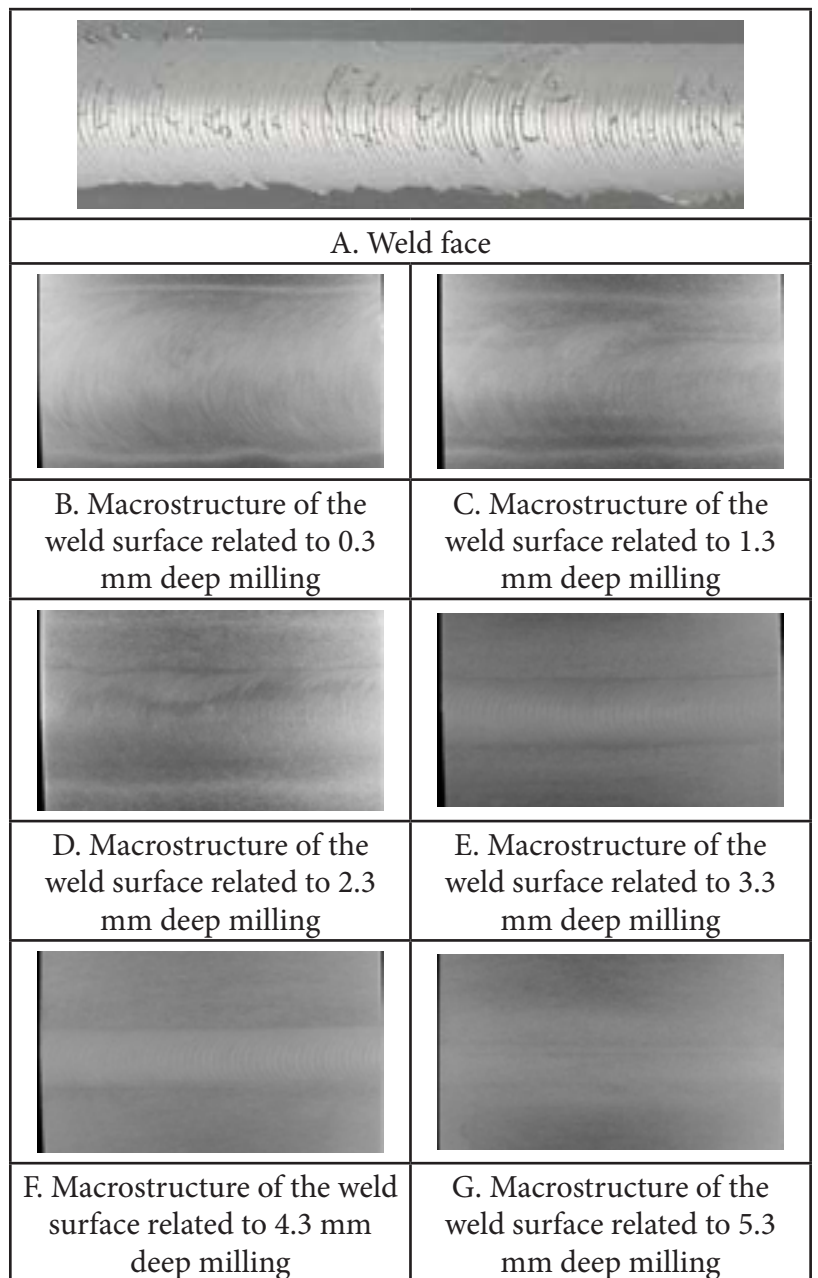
Macrostructures of individual layers of the weld subjected to milling on the weld face side in accordance with the schematic diagram presented in Figure 10; welding parameters $V_n = 1120$ rpm, $V_z = 1120$ mm/min; Triflute type tapered tool; etchant: Keller’s reagent [8]
